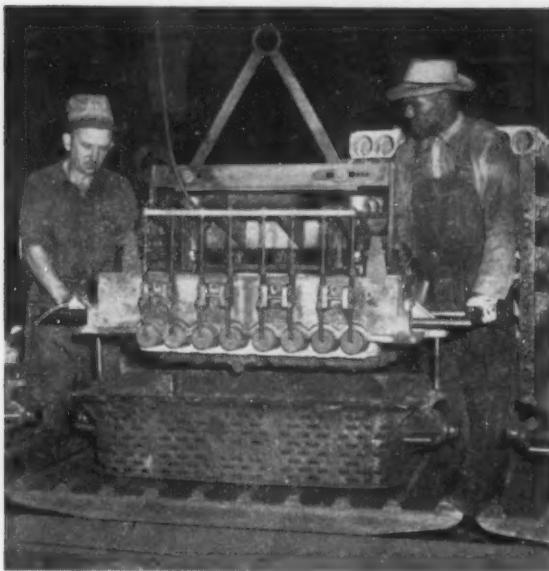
This lifter device is used to transfer a cylinder block core assembly to a drag mold. Breakage is minimized and correct location of the core in the mold is assured.
